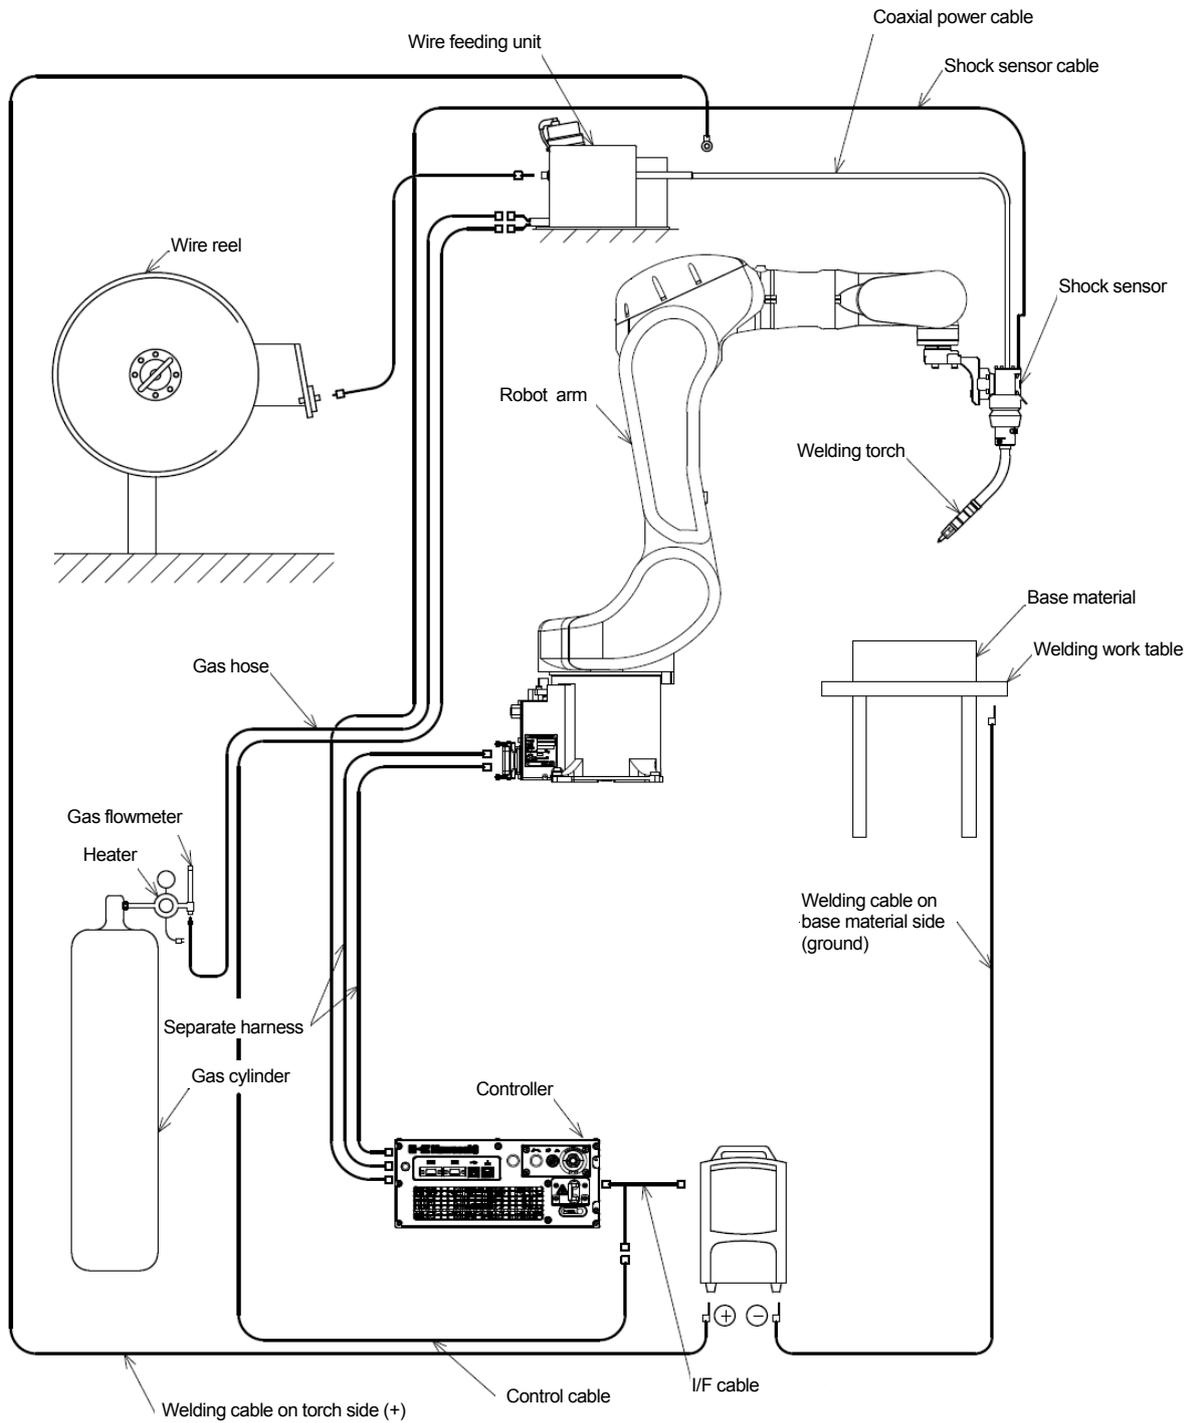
Welding equipment connection example (DAIHEN welder DM-350)
